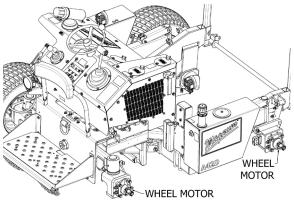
Wheel Motors (Wheels removed for clarity)
